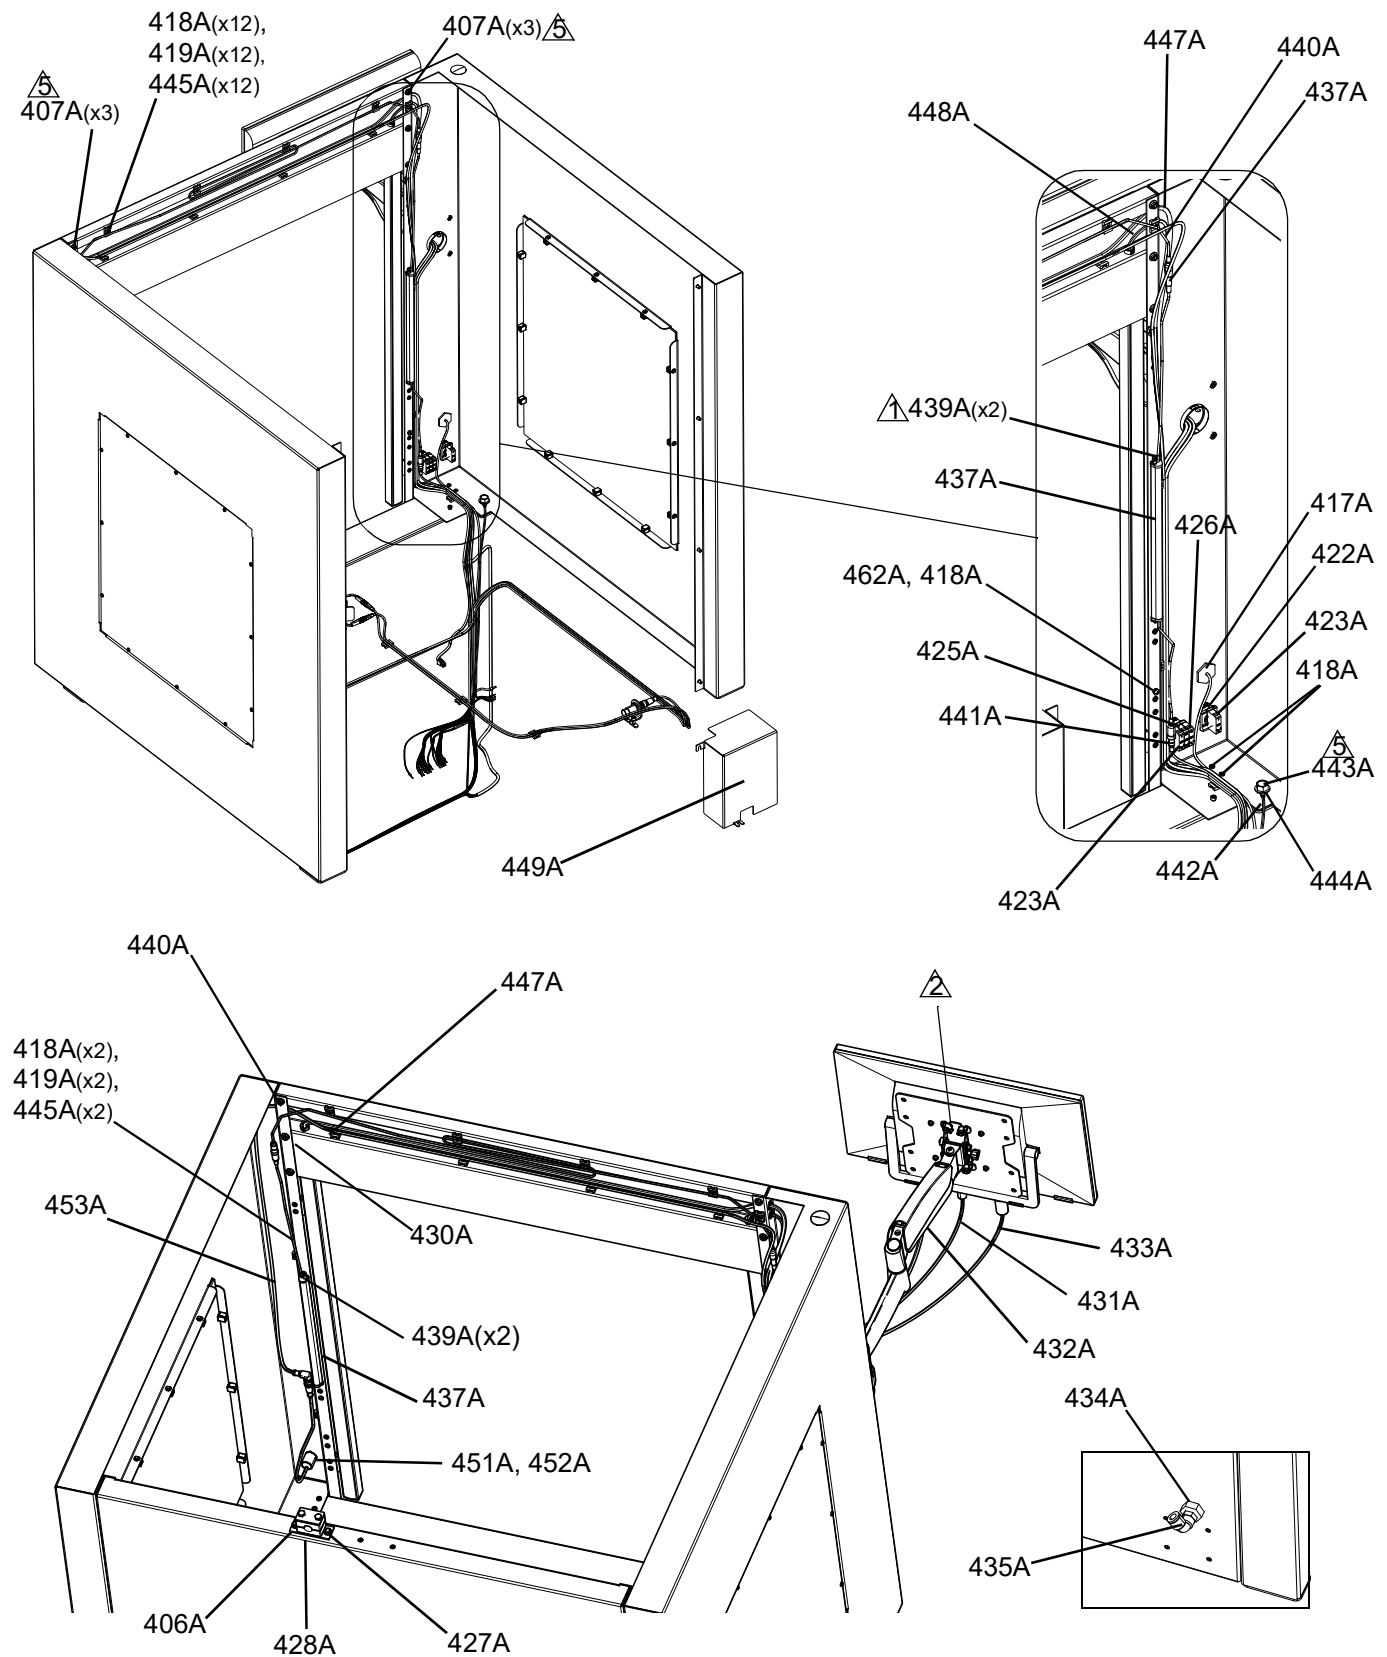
C-500 Guard Assembly Rear and Interior Views
